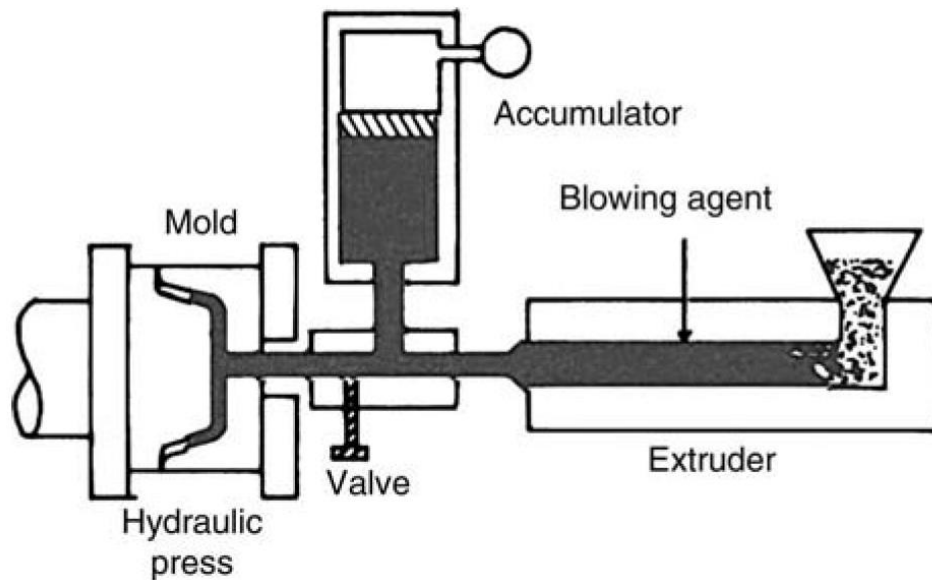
Direct gassed injection moulding apparatus ⁵⁰.
